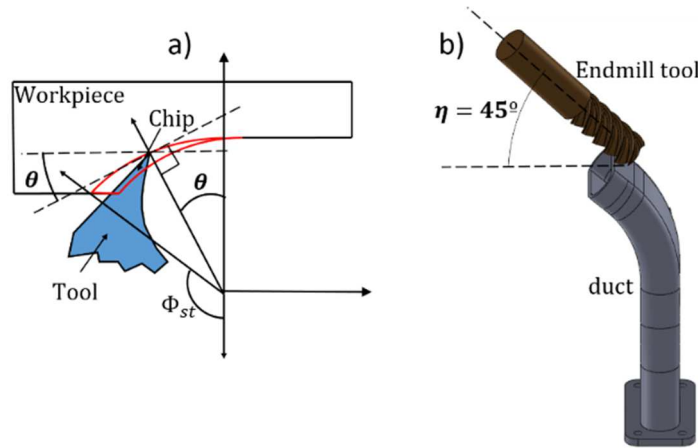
Tool position relative to workpiece and engagement angle. a) engagement angle θ , b) tool position angle relative to workpiece
